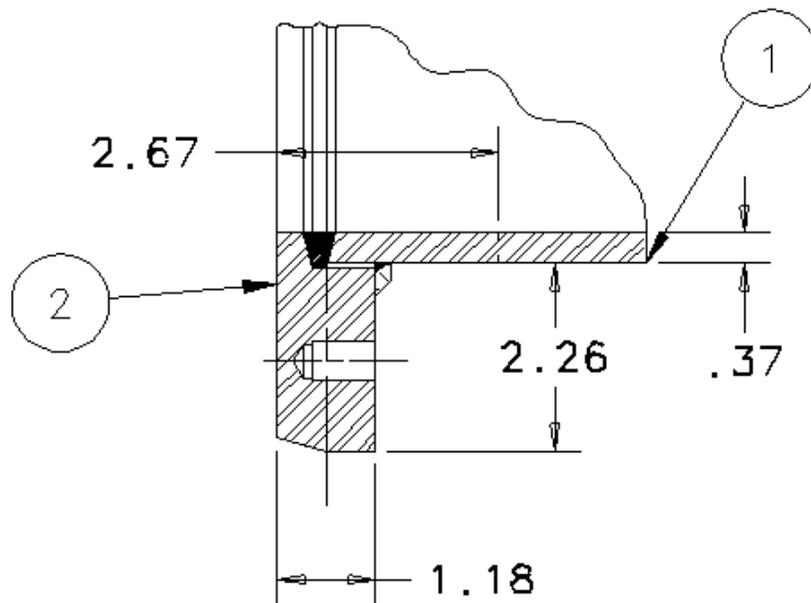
, The cross-section view of the end flange with the vessel shell, also refer to detail L of drawing ME-443027, and drawing MD-443039..
